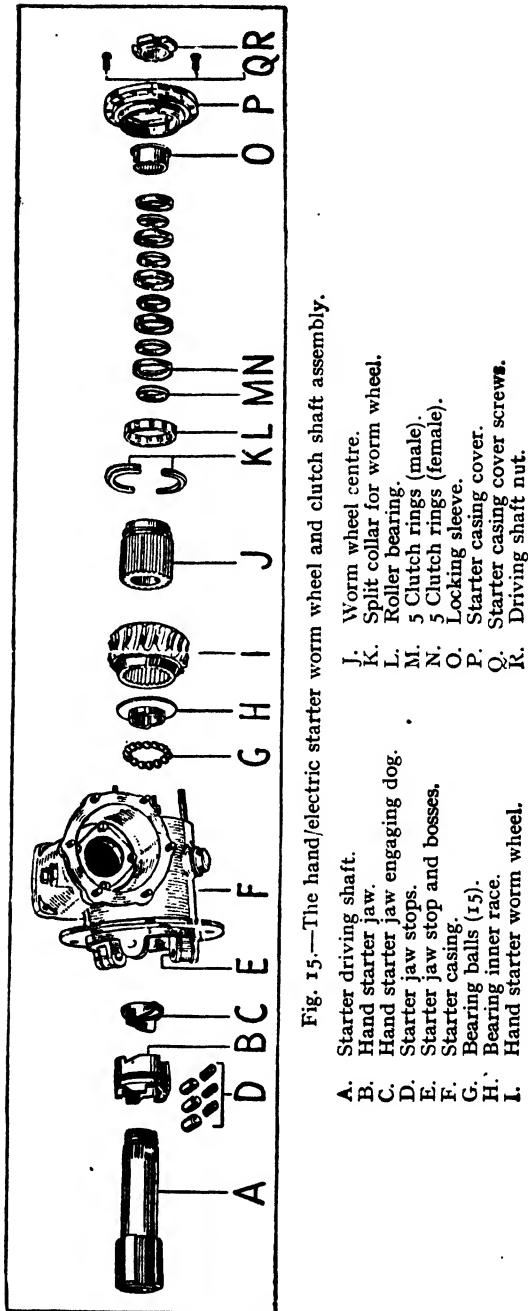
The hand/electric starter worm wheel and clutch shaft assembly.
